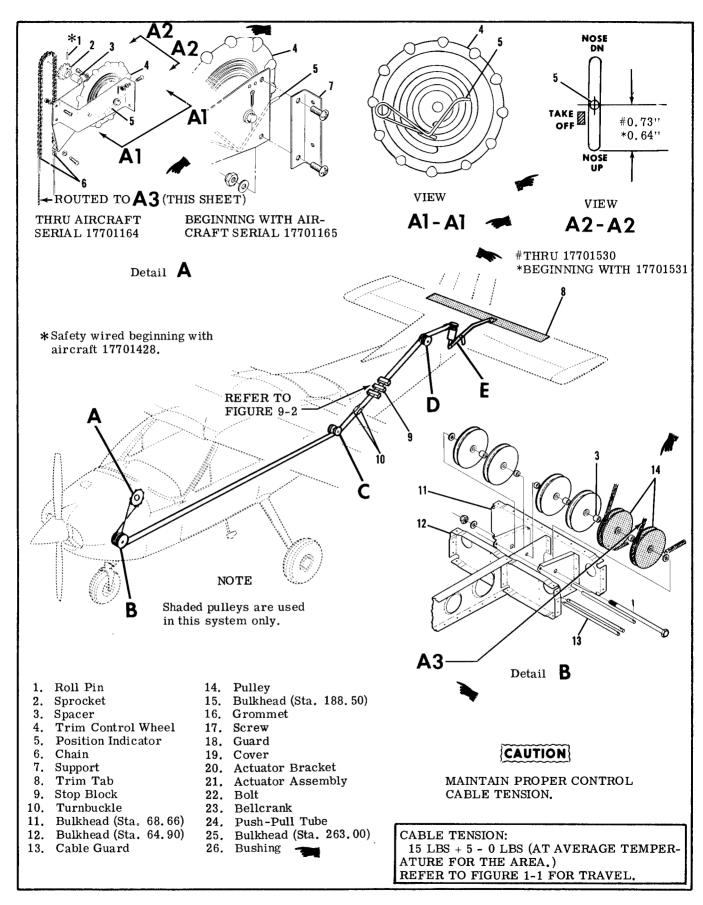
Stabilator Trim System (Sheet 1 of 2)
